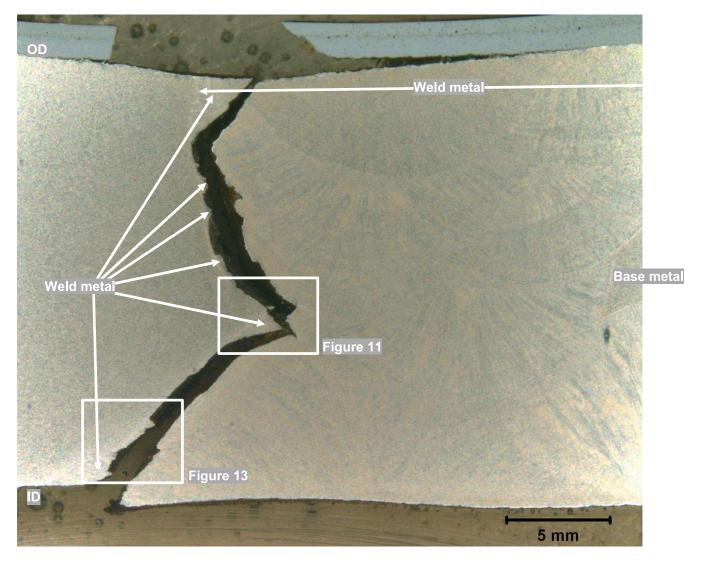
Light photomicrograph of transverse Mount M1 showing the fractures surfaces in cross-section (2% Nital Etchant); area indicated in Figure 9. There appears to be 5 (or 6) weld passes made from the OD surface and 2 from the ID surface with the ID passes being deposited first. The figure shows that the crack path is through the weld metal at the OD surface, ID surface, and midwall, and located at or near the fusion boundary elsewhere. Most of the material is base metal left of the fracture path and weld metal right of the fracture path.
